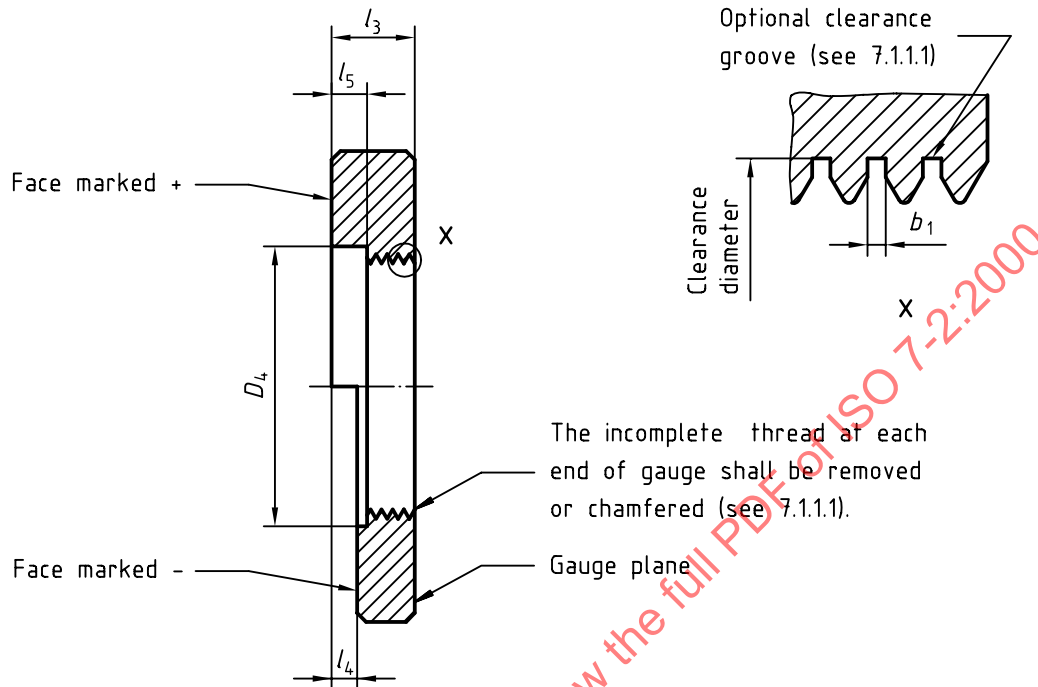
Parallel full form threaded ring gauge (gauge No. 3)
